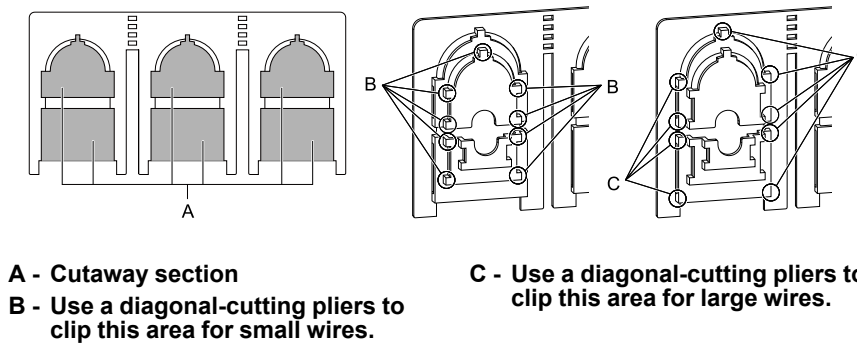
Clip the Cutaway Section of the Wiring Cover
